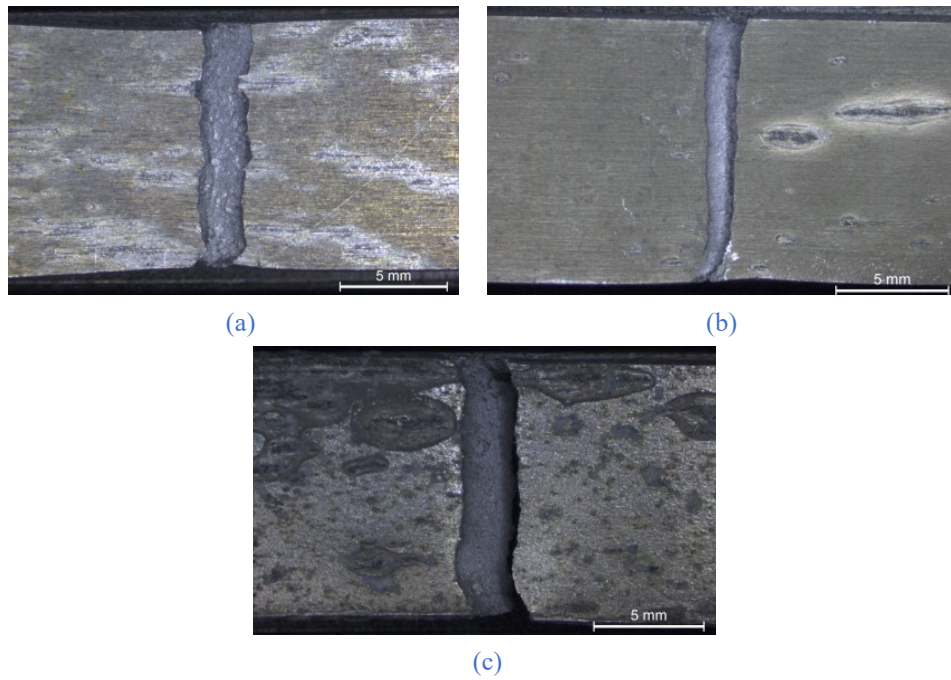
Typical photographs of the fractured surfaces of AA2024-T3 pre-corroded tensile specimens exposed to 3.5 wt. % NaCl solution for (a)-(c) 6 h, 168 h and 720 h, respectively.
